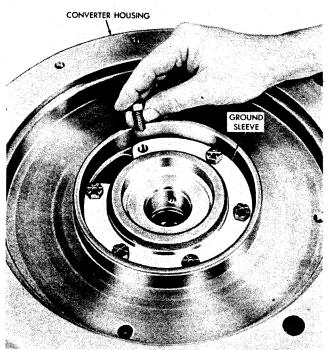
Installing converter ground sleeve bolts \$2426
